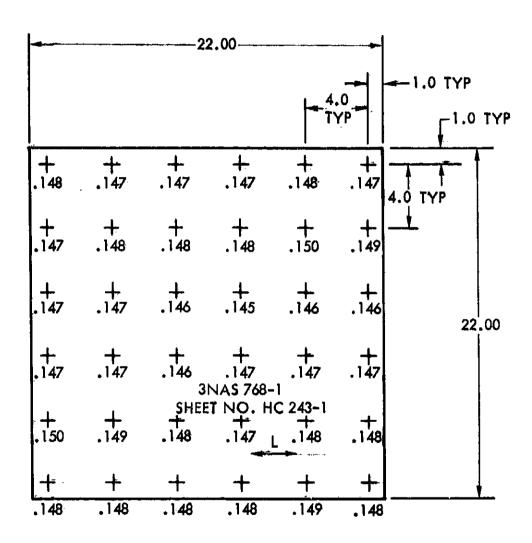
Aluminum Panel Used as Drill Jig for Identical Size .15 Inch Thick Be-38Al Lockalloy Panel.
